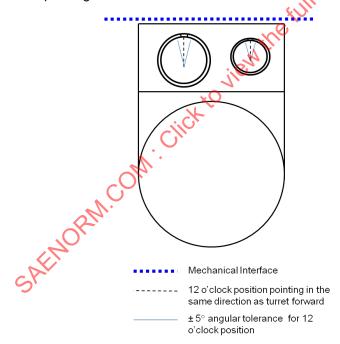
CONFIGURATIONS FOR MAJOR KEYWAYS FOR ELECTRICAL CONNECTORS WITH THE CENTERLINE AXIS PARALLEL TO THE MECHANICAL INTERFACE DATUM
